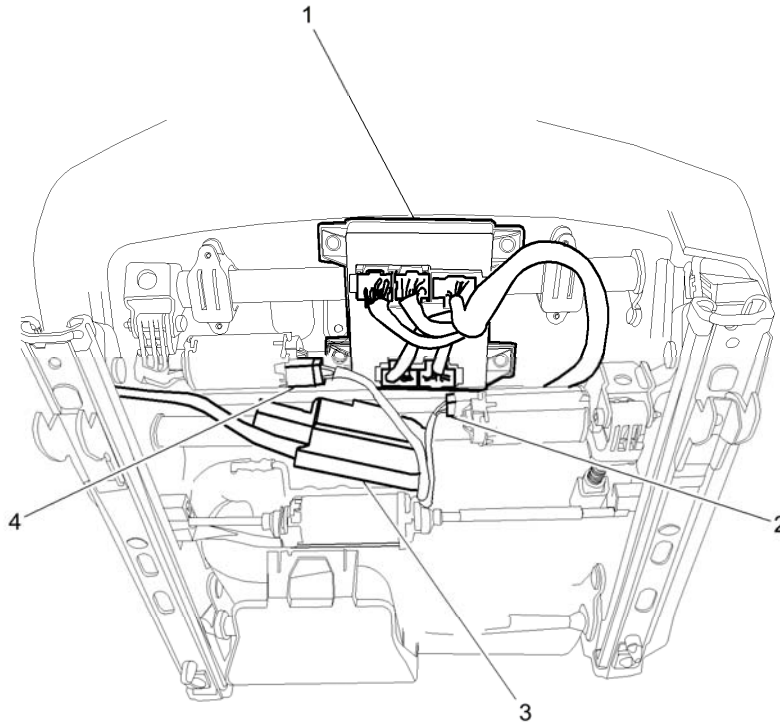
Bottom of Driver Seat Component Locations (with A45)
